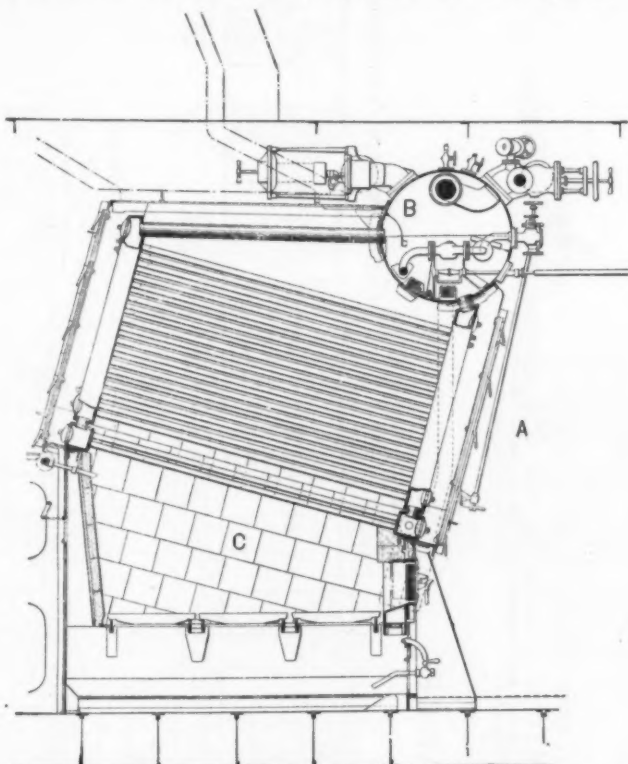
BABCOCK AND WILCOX BOILER SHOWING INCLINED ARRANGEMENT OF TUBES, FIRE-BOX AND WATER AND STEAM DRUM.
